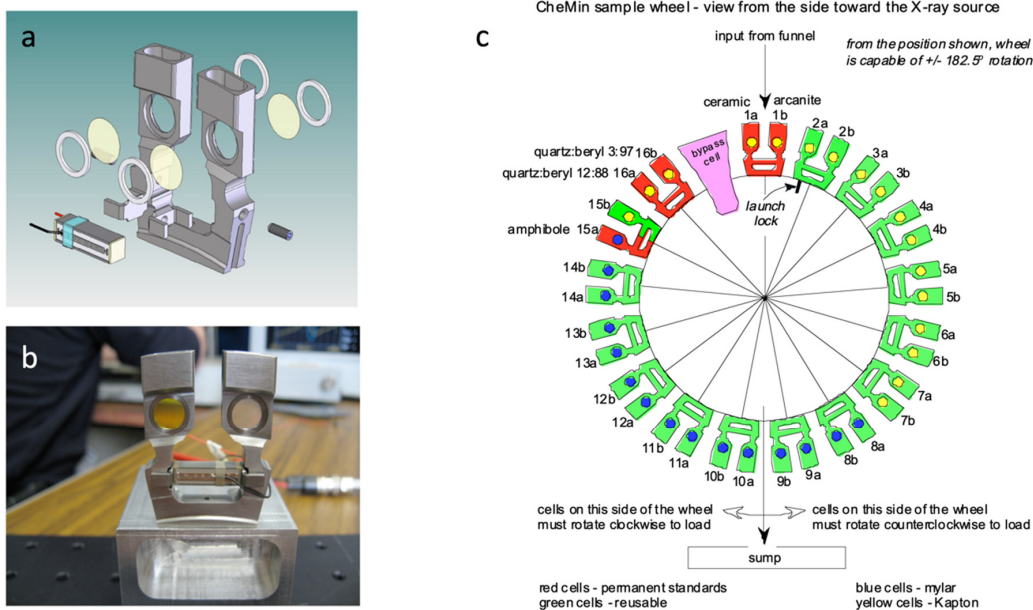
CheMin cell geometry. (a) Exploded view of dual-cell assembly, showing windows, tuning-fork assembly and piezodriver. (b) Assembled cell, ready for testing (Yellow Kapton window on left, clear mylar window on right). (c) The CheMin sample wheel, showing the location of sealed standard cells and open cells used for powder samples delivered by the SA/SPaH system. The cells are filled and analyzed at the top, then rotated 180° and emptied into a sump at the bottom of the instrument.
